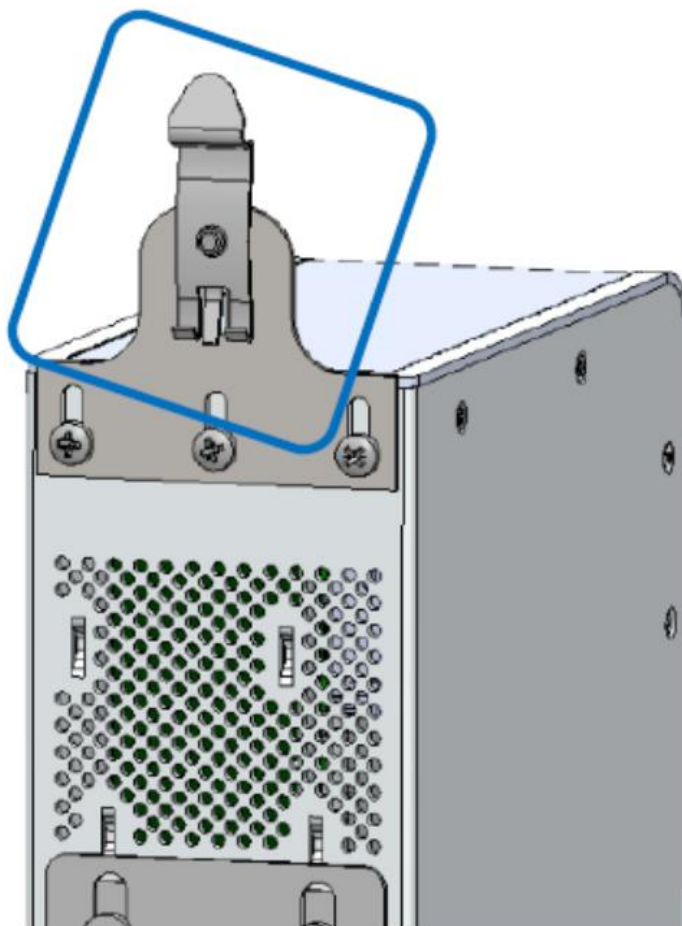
Reason H49 DIN Rail Mounting Details - Rear View with Weidmuller Clip
